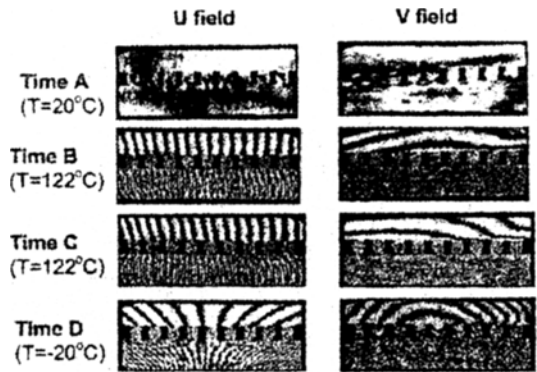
U and V displacement field patterns of the small ceramic BGA package assembly (CBGA 9)
